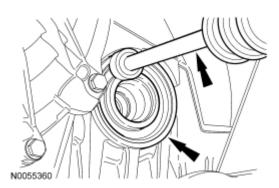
Removing Halfshaft Seal Using A Suitable Dent Puller
